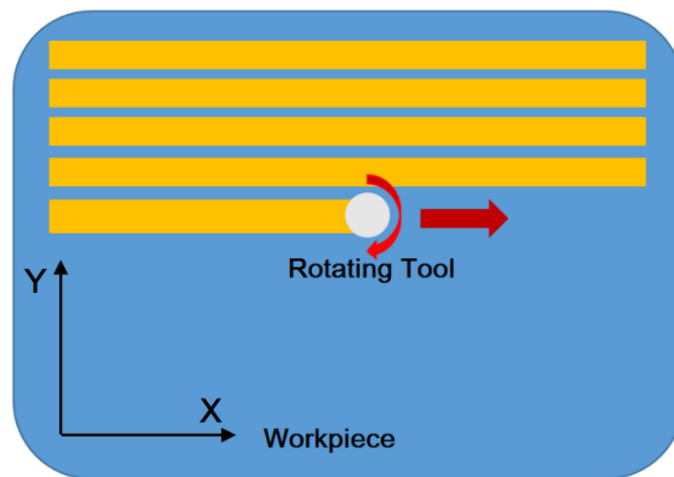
A rotating tool that working on a surface with raster tool path.
